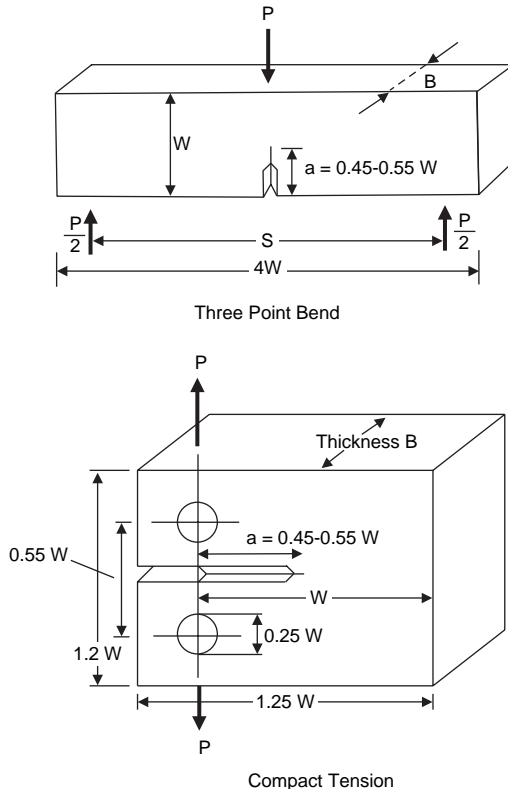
Fracture toughness test specimens. Source: Ref 9
